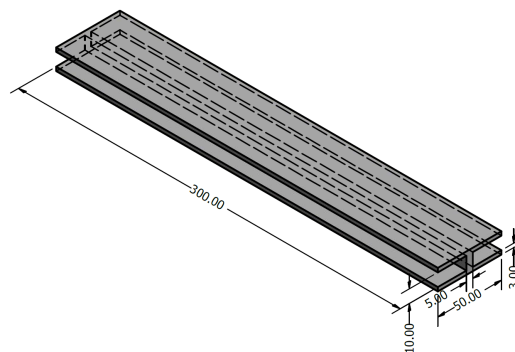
Outline and dimensions (in units of millimeter) of the experimental assembly. (the 6 M3 bolts and the bolt holes are excluded)
